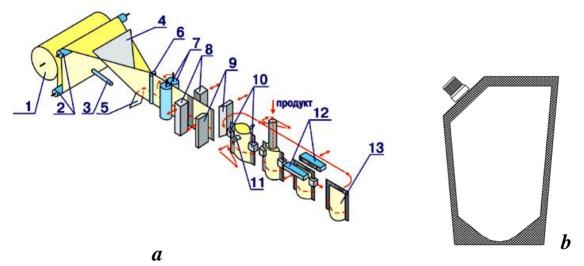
Technological scheme of paste packing in packages "doypack" (a) and a package doypack with a cork (b) 1-roll of film, 2- film unwrapping, 3-puncher, 4-pipe formation, 5-photosensor, 6,7- swaths, 8-longitudinal welding, 9-cutting, 10-package opening, 12- sealing of the package (in packages with the cork, between the cutting mechanism 9 and the mechanism of package opening 10, there are a mechanism of corner cutting of the package 9-a, a mechanism of cork supplying 9-b and a mechanism of the cork welding 9-c – are not shown).
